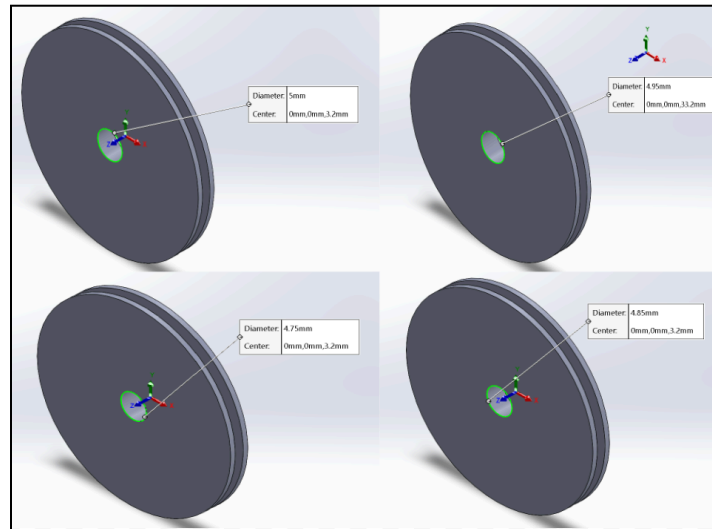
Tolerance Tested Pulley Wheels in SolidWorks
